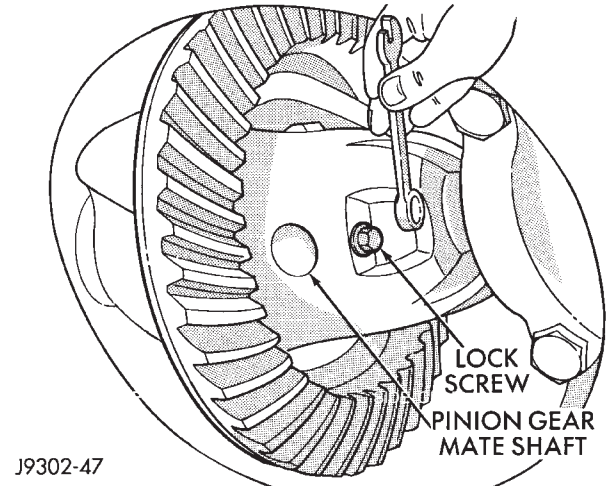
Pinion Gear Mate Shaft Lock Screw
